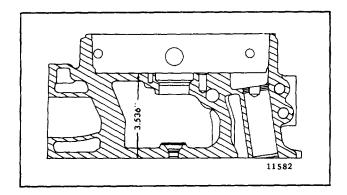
Minimum Distance Between Top and Bottom Faces of Cylinder Head
